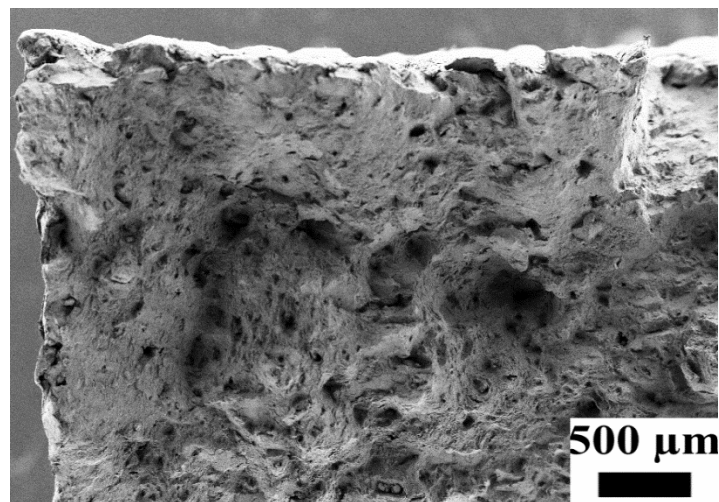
Example of fracture surface of an LPBF AlSi10Mg specimen after tensile test observed at FESEM [153].
